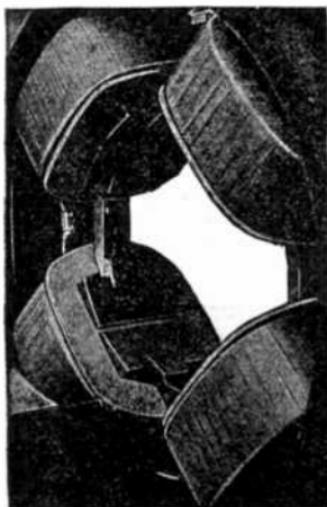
,266.—Stationary field of General Electric multiphase revolving armature alternator; view showing brass grids on pole pieces for synchronous motor operation. When designed for this use the machine is provided with amortisseur winding on the poles. As shown in the illustration this winding consists of a brass collar around the pole tip with a cross rib integral with the collar, fitting in a slot in the pole face parallel with the shaft. This construction assists in bringing the machine up to synchronous speed as an induction motor, ordinarily checks any tendency toward hunting and does not in any way affect the operation of the machine as an alternator. The main field winding should be connected through switches in the field frame in order that the field circuit may be broken up to eliminate any danger that might arise from induced voltage. It is not advisable to throw on a full rated voltage and a compensator should, therefore, be provided to reduce the pressure.
